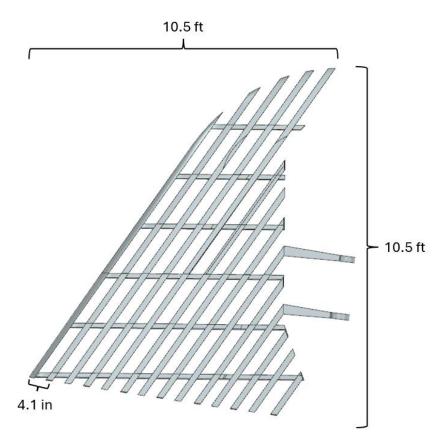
DIMENSIONED VIEW OF V-TAIL
